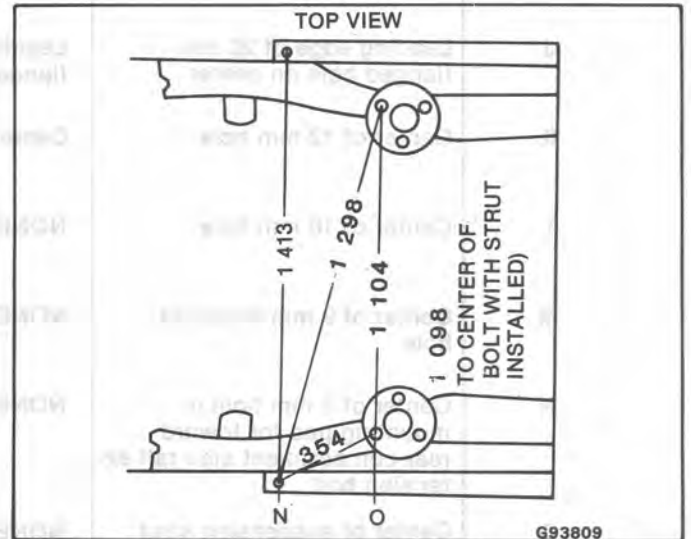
Rear Compartment Upper Side Rail and Suspension Strut Tower Dimensions
